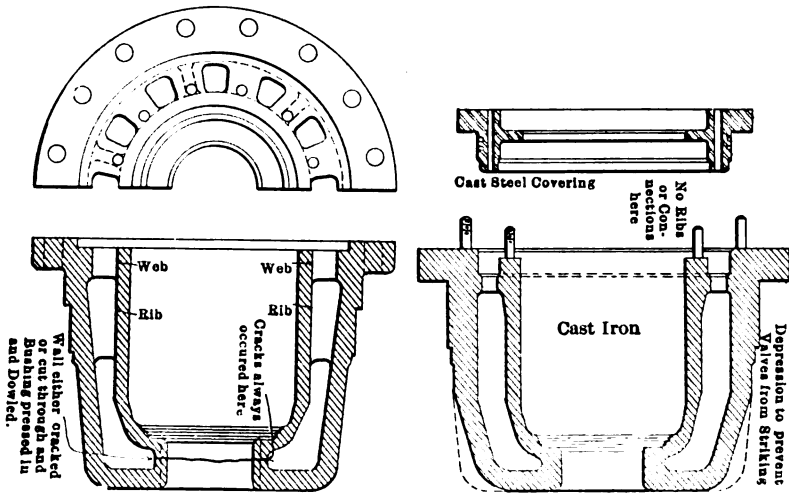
SECTION OF ORIGINAL CYLINDER HEAD
